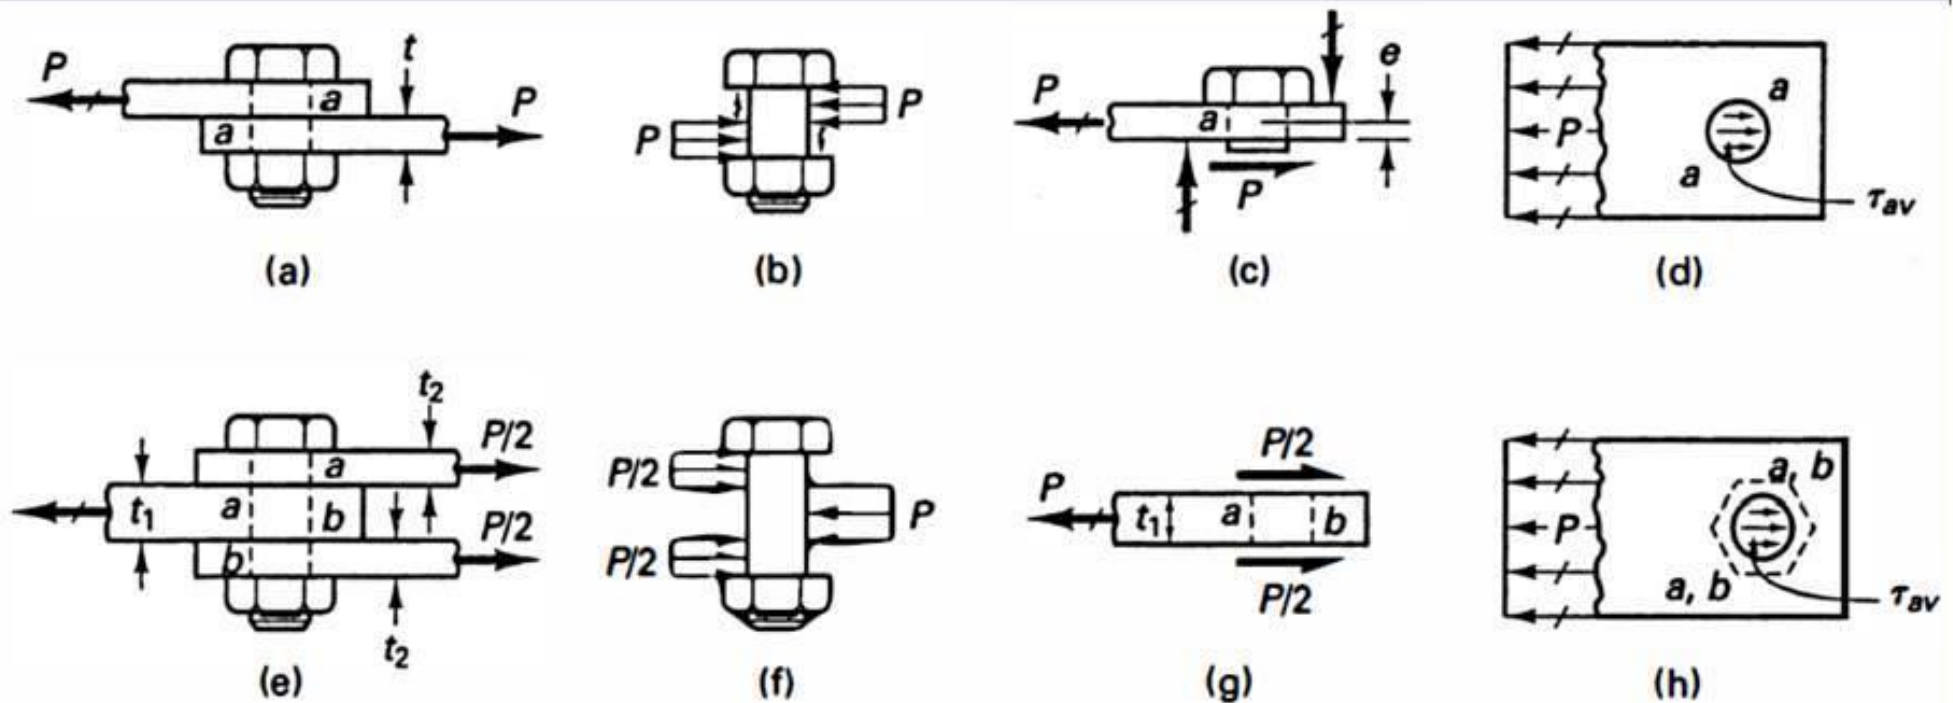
Loading conditions causing shear and bearing stress in bolts.
